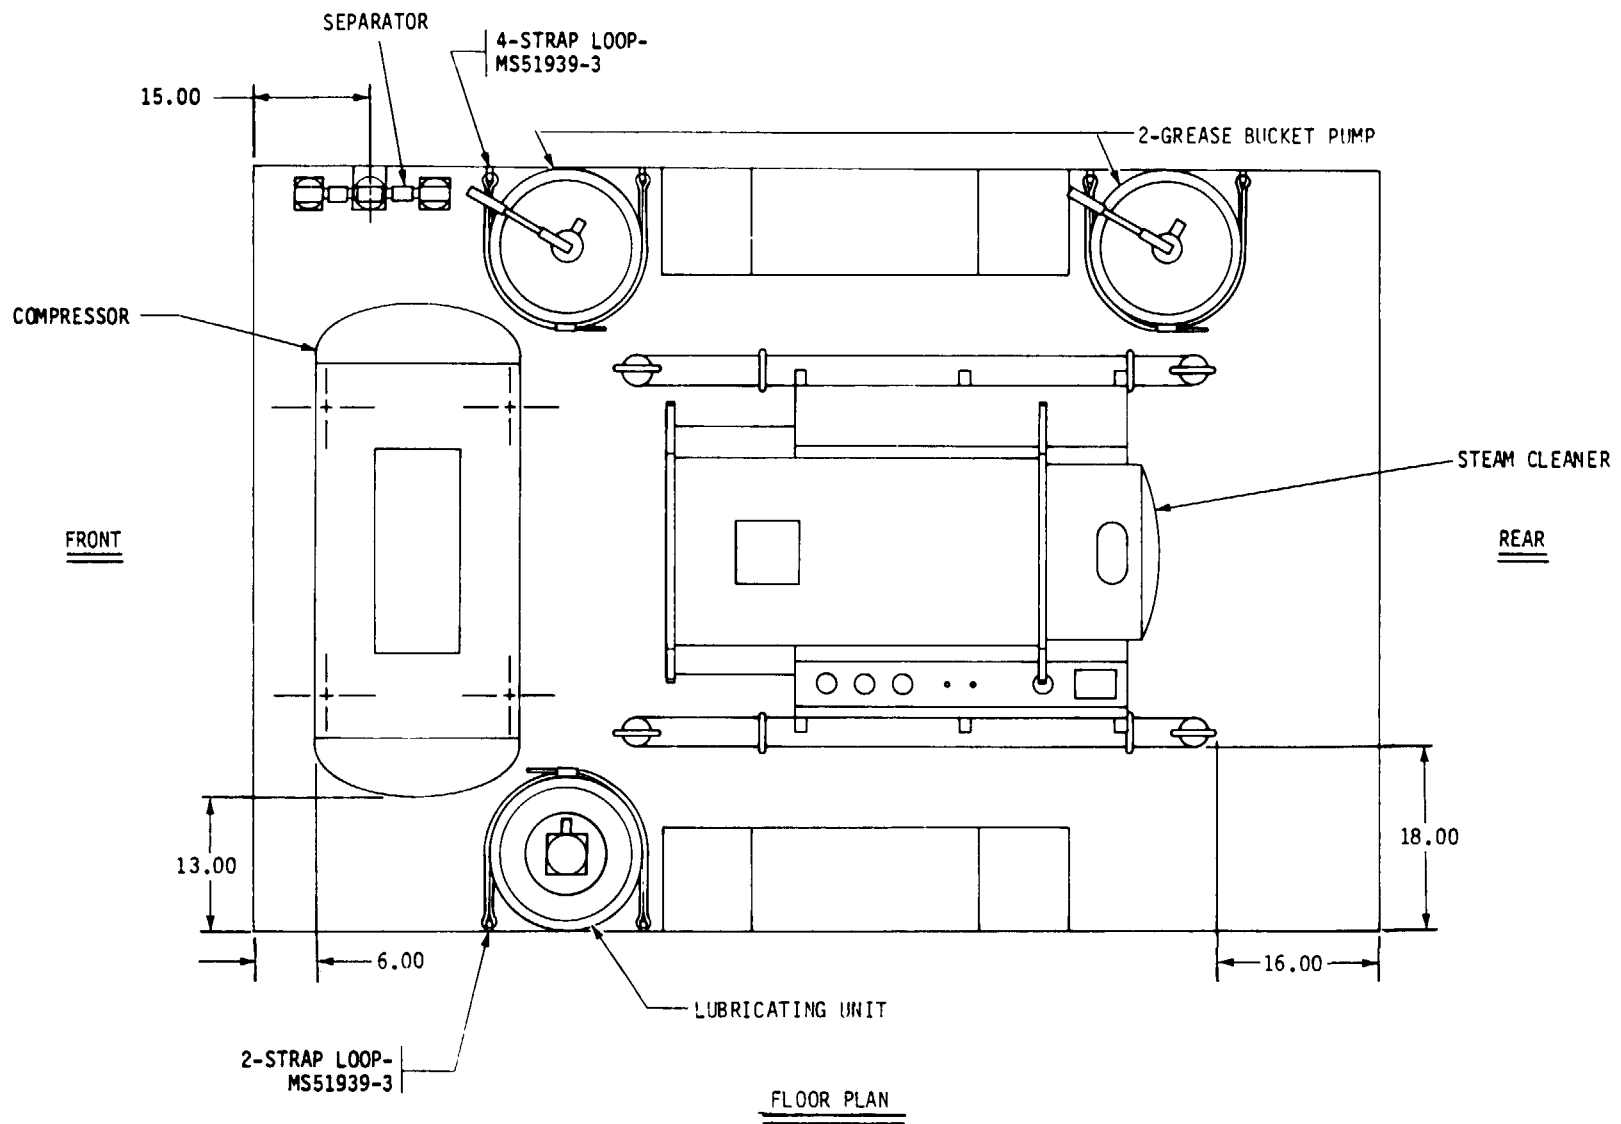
Components to be Mounted, Unit 5, M105A2, Floor Plan.
